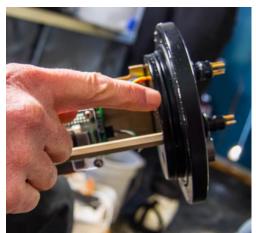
O-rings (2) located on the cover of the controller with battery pack assembly.
